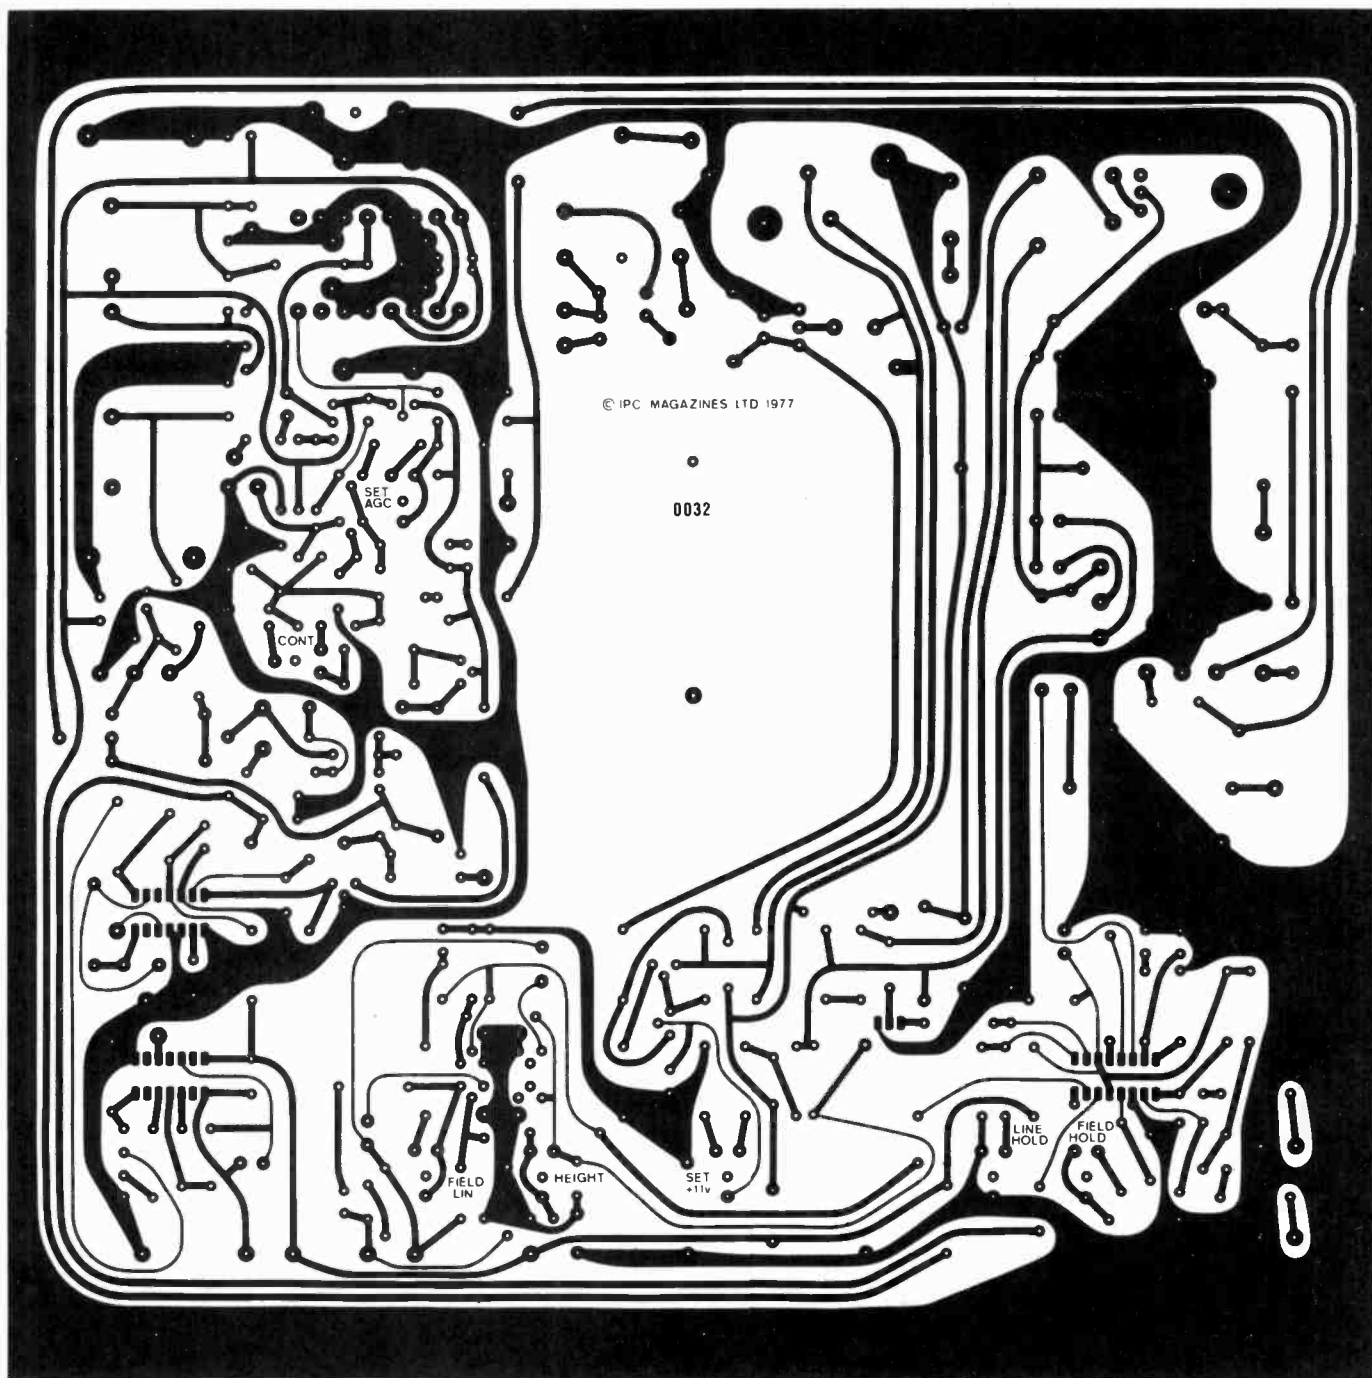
Printed board print pattern (not to scale). The actual size is  $11\frac{3}{4} \times 11\frac{3}{4}$  in.
